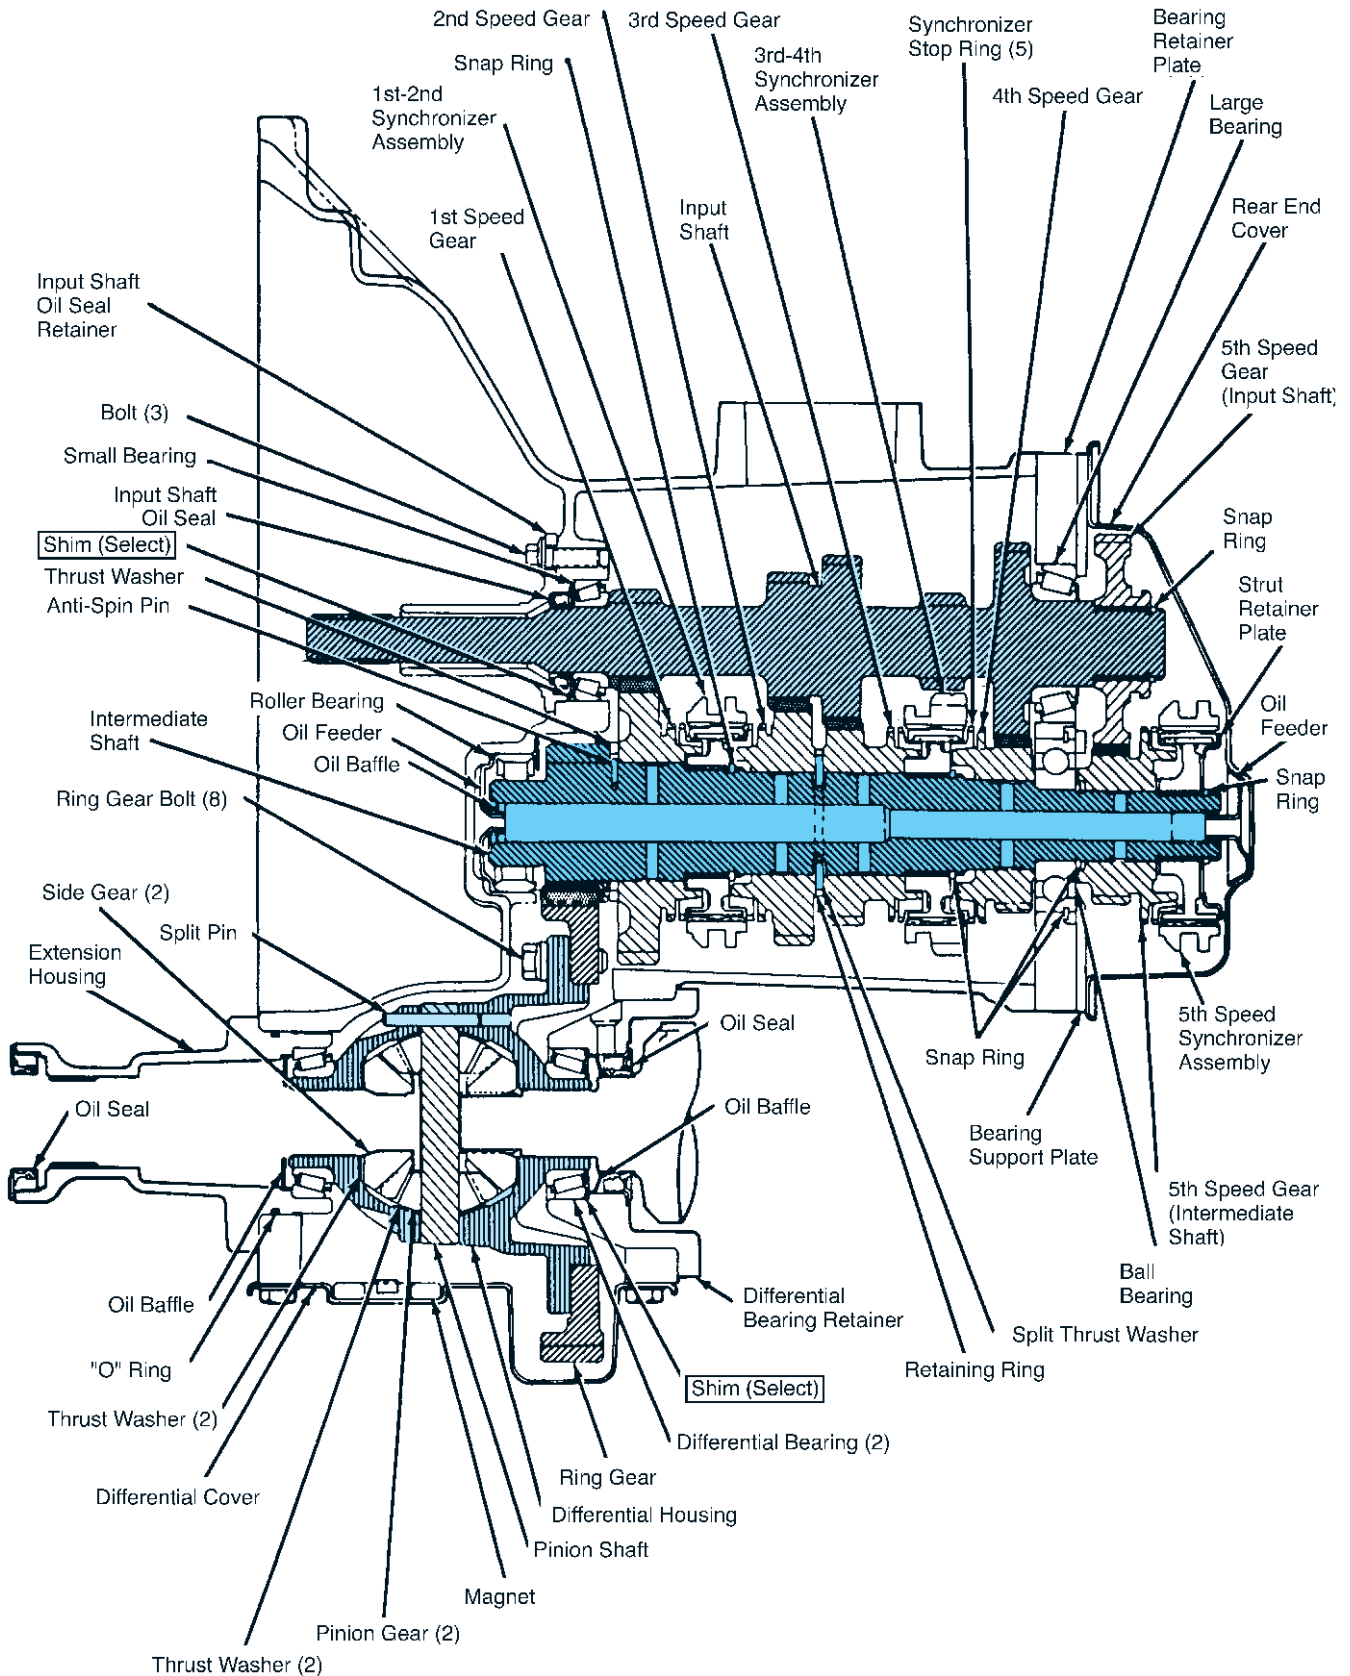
Five-speed transaxle. Note that all of the gears are fixed as a cluster to the input shaft and that the speed gears and synchronizer assemblies are on the intermediate (main) shaft of this transaxle. (Courtesy of DaimlerChrysler Corporation)
